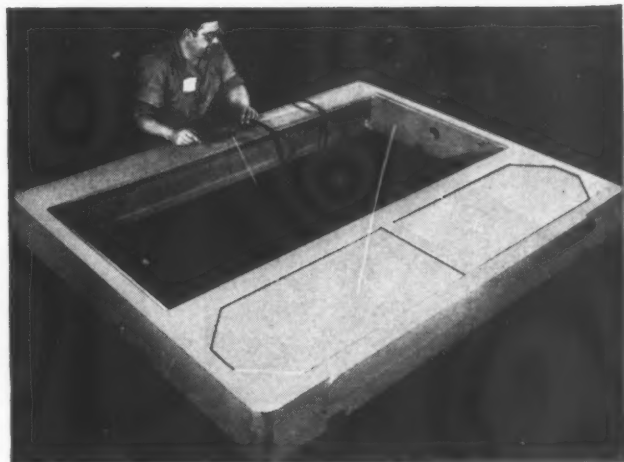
The new welded steel base for 150 KW machine shown in Fig. 1.
